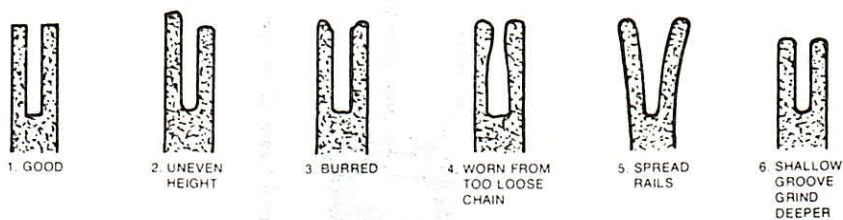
Wear Pattern in Guide Bar Groove and Bar Rails
